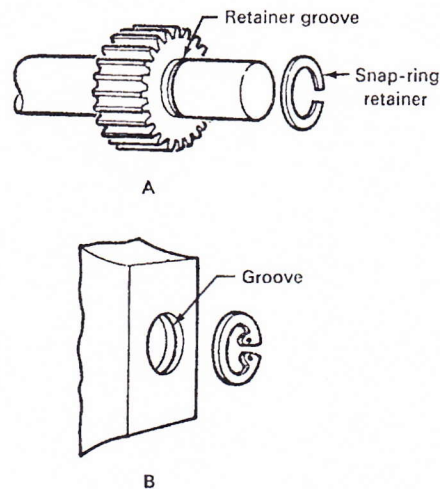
19 Installation of Snap Rings: (a) External Shaft-mounted Ring; (b) Internal Bore-mounted Ring.
